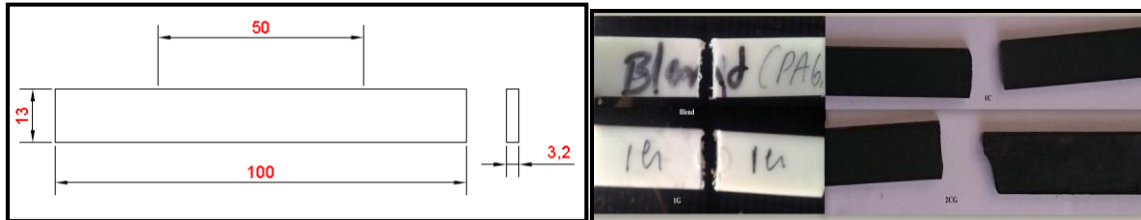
Specimen dimension for flexural test as per ASTM D790, Fractured specimens of different fibers reinforced
